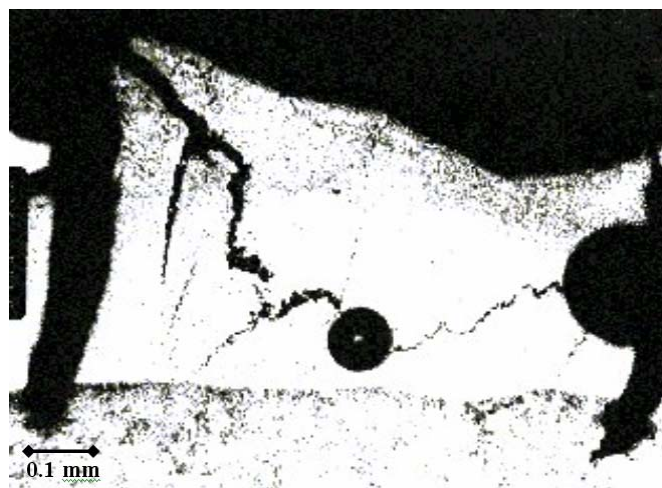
[9]. Crack, chipping and blow holes in padding weld DPT-6. Under the operating loads the padding weld has cracked and its fragments are pressed into the base material (bucket tooth). Etch. 3% HNO<sub>3</sub>
